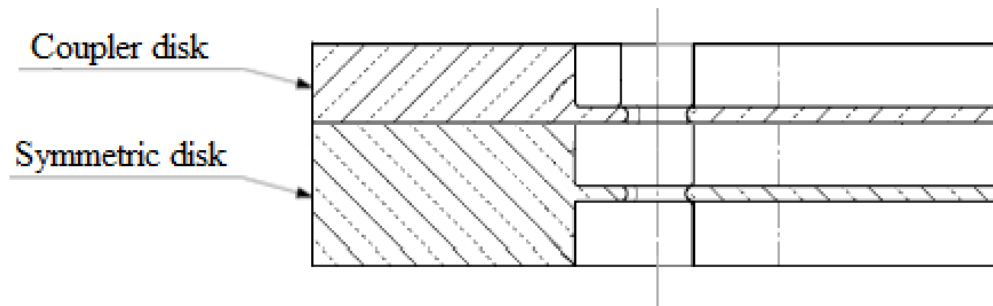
Sketch of the test assembly. (Courtesy of CERN)
